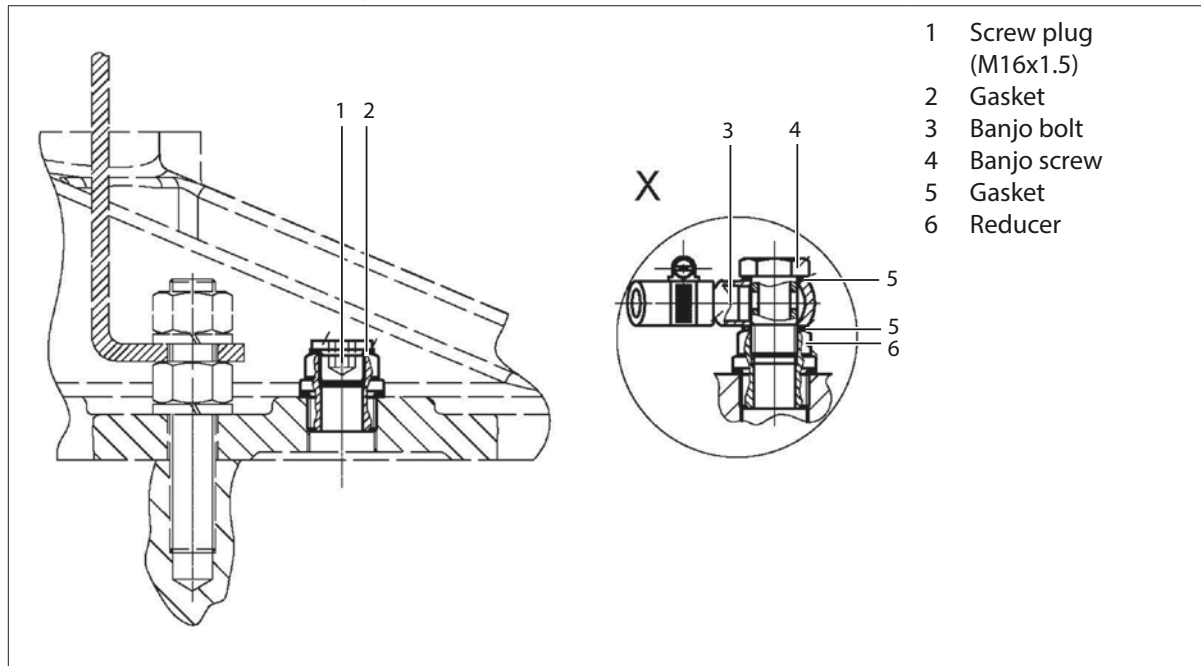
Accessory set, Part 3: Hollow screw and two gaskets
